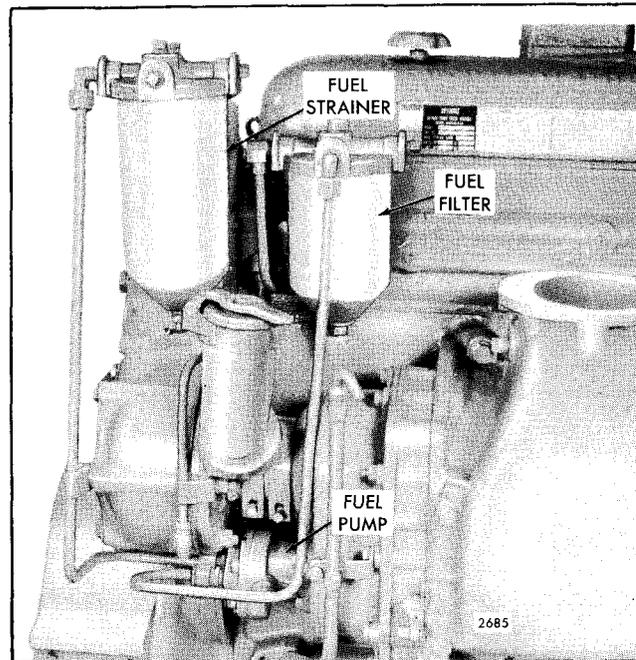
Fuel Pump, Fuel Strainer and Fuel Filter Mounting
